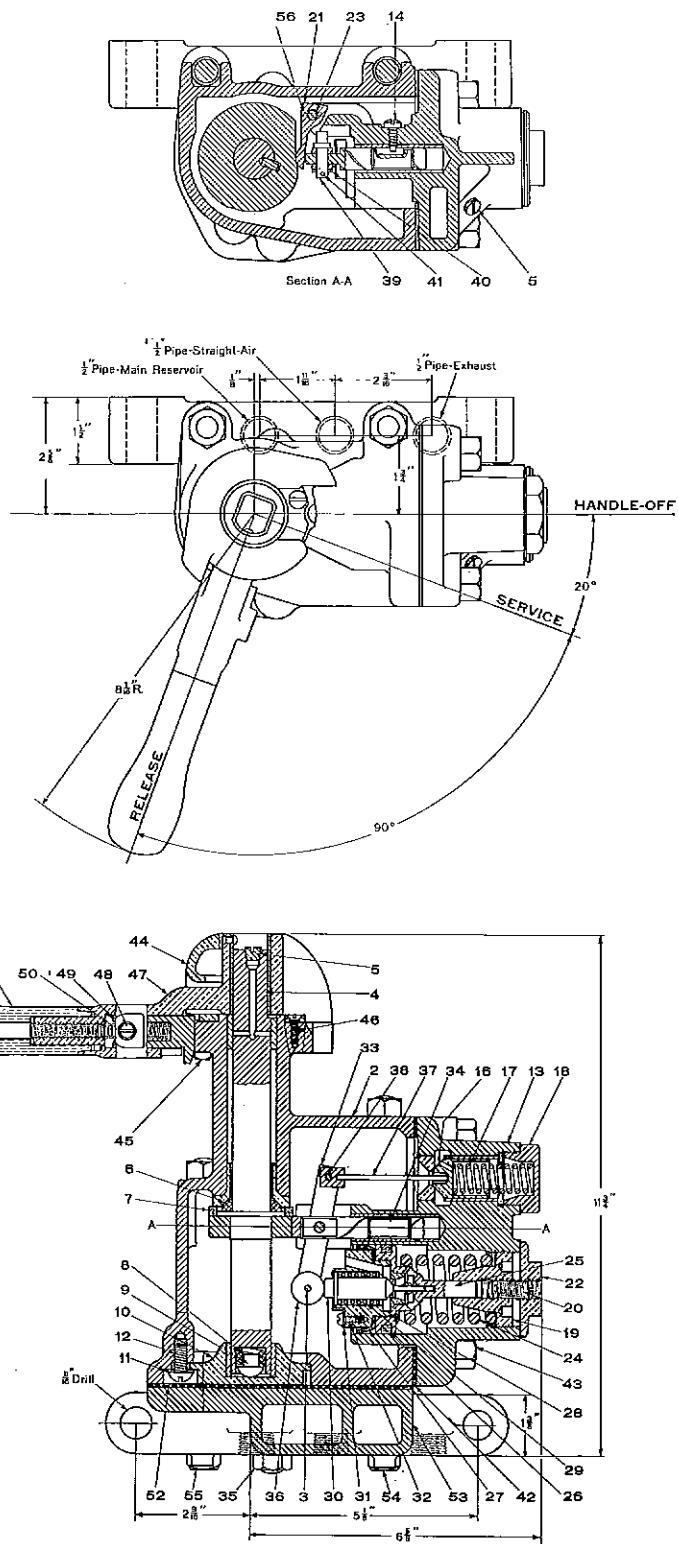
SA-2 Self-Lapping Brake Valve, Assembly
